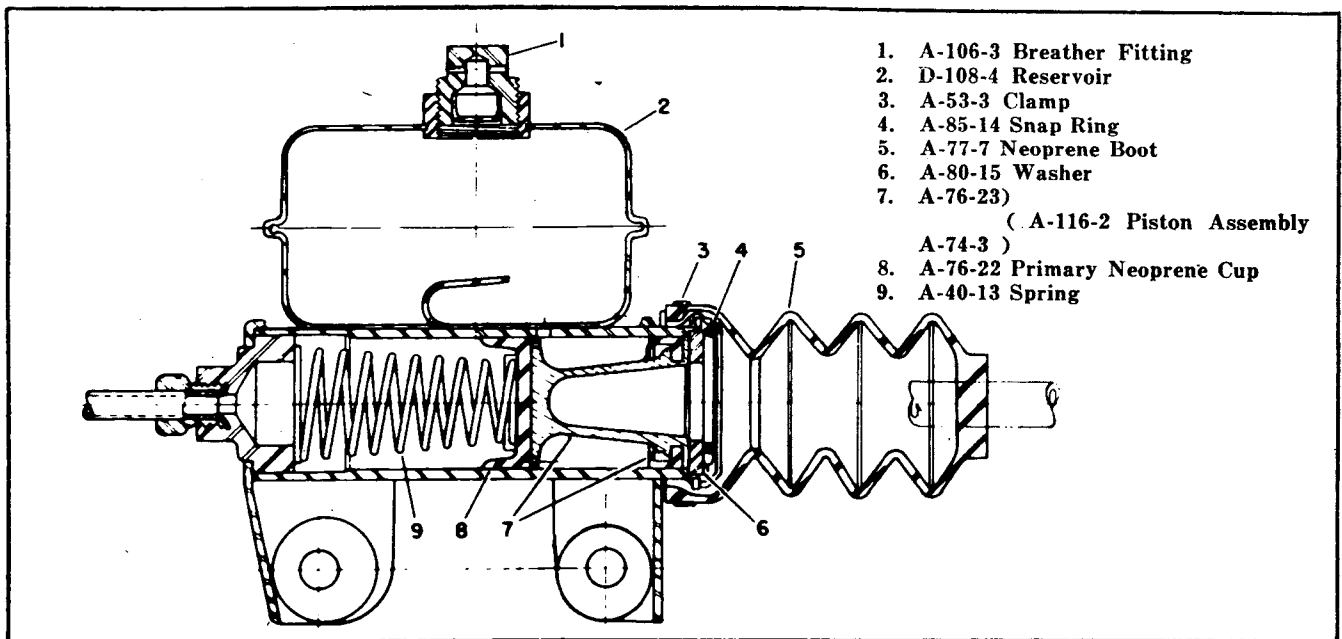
Brake Master Cylinder, Hayes No. D-87-36
